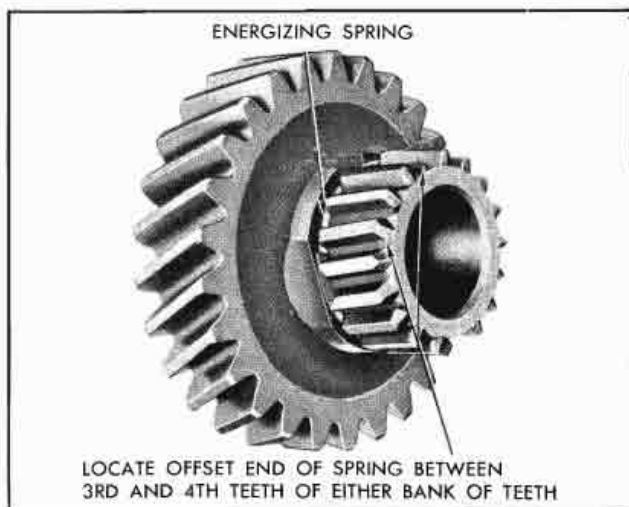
Position of Synchronizer Ring Energizing Springs
